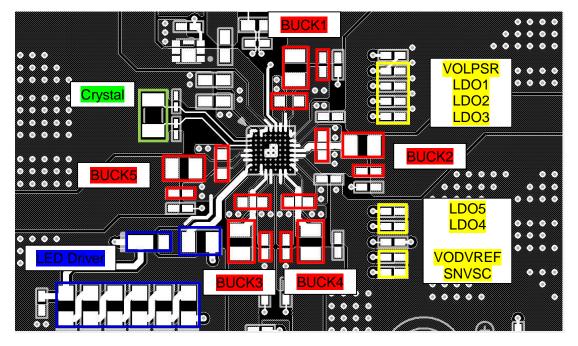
BD71815AGW Reference Board Breakout and Parts Placement (Top Layer)
